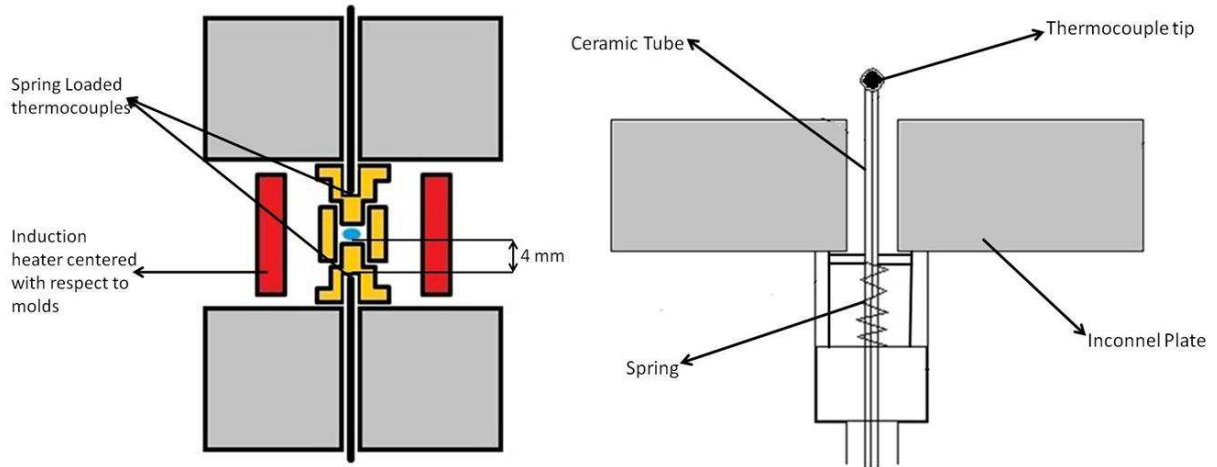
Cross sectional view for entire molding experiment (left), Concept behind spring loaded thermocouple (right), (not drawn to scale)
